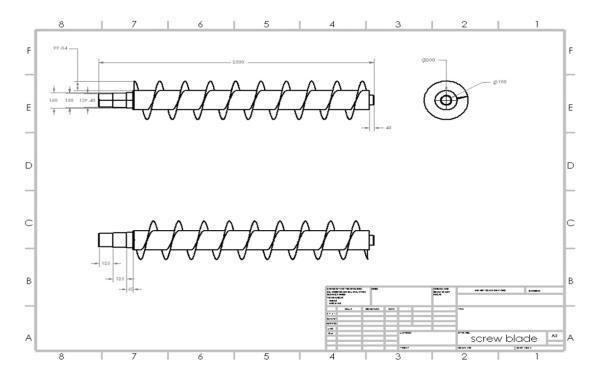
CROSS-SECTIONAL VIEW OF SPIRAL BLADE
